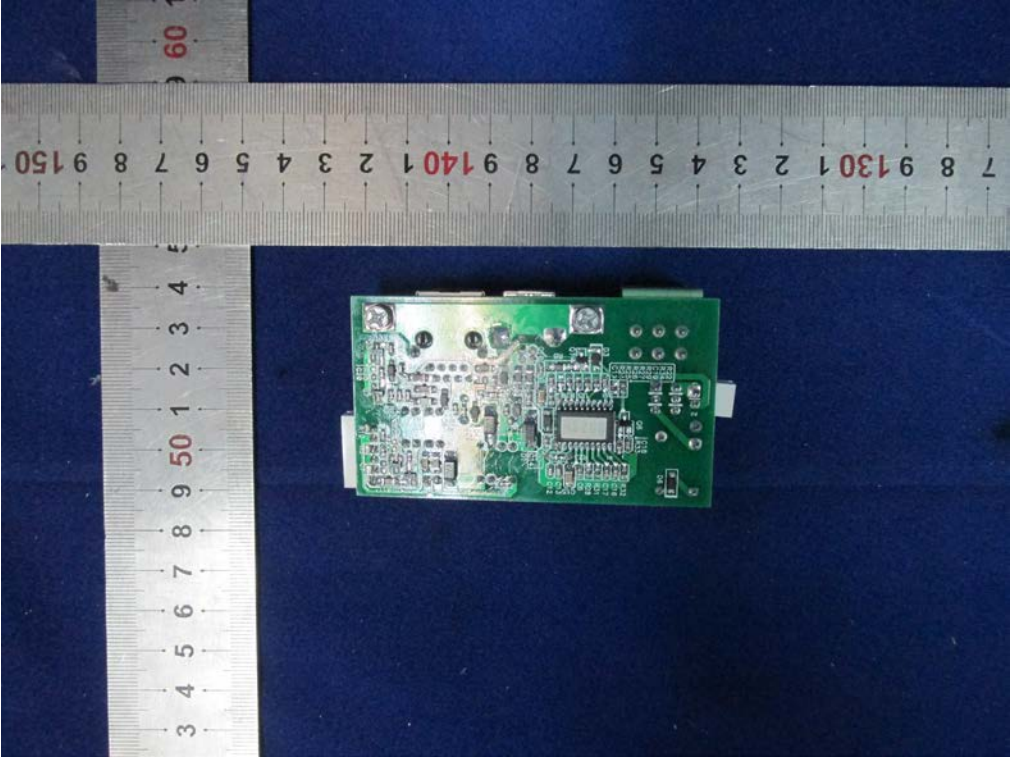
FlinInfini Lite 5kW-48V PCB of COMM board trace view
